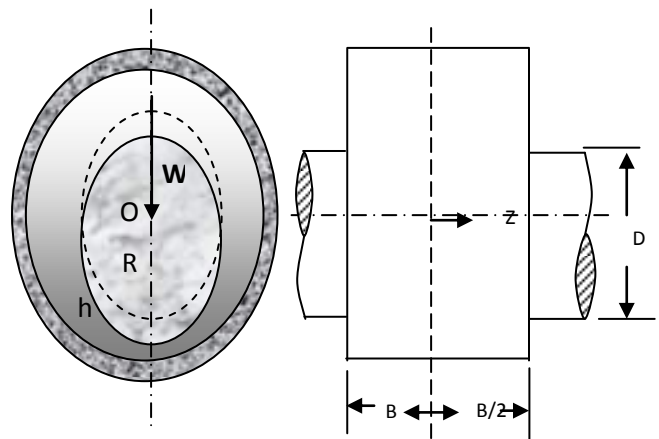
Physical configuration of Elliptical Squeeze film Bearing
